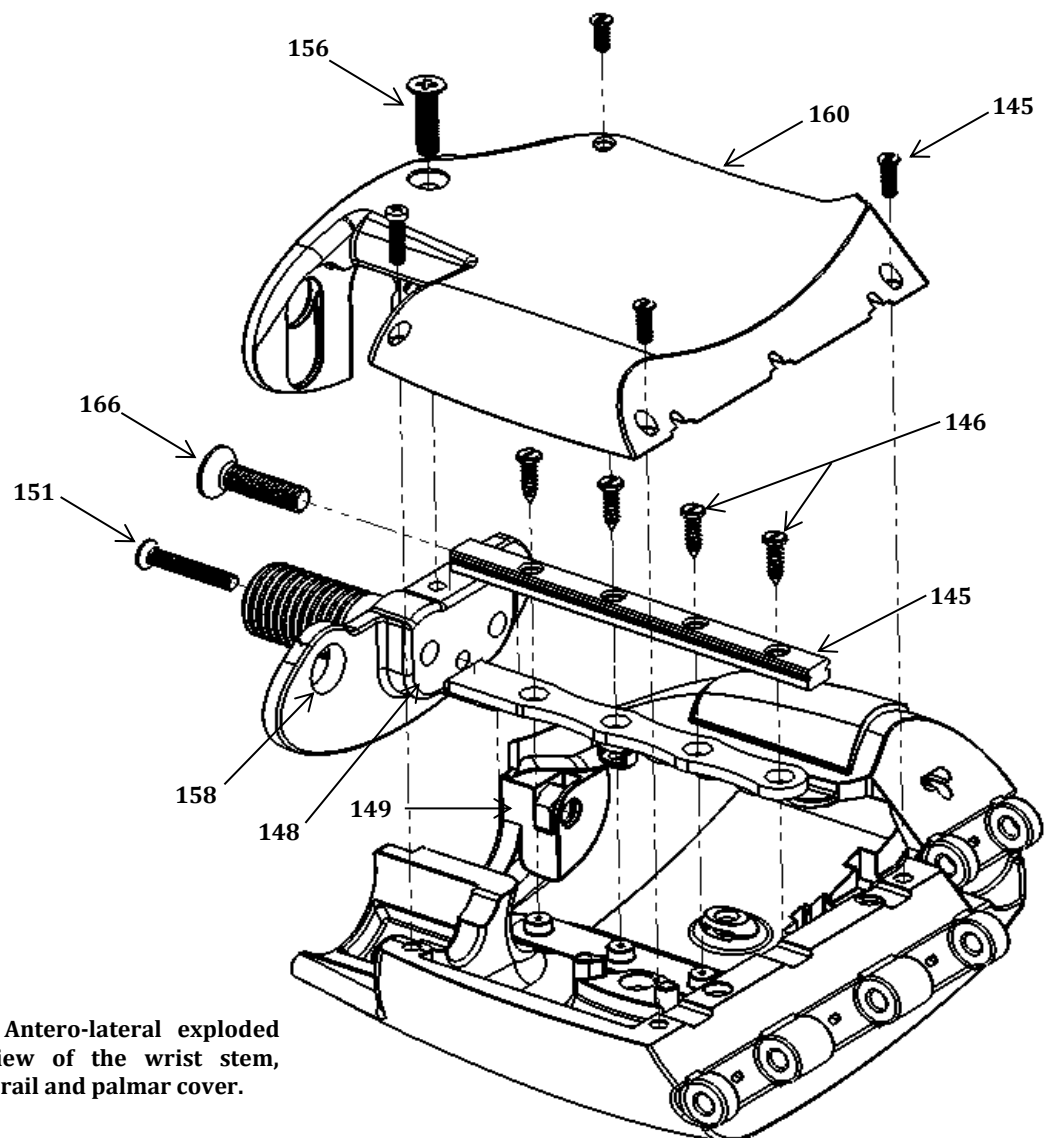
Antero-lateral exploded perspective view of the wrist stem, linear-bearing rail and palmar cover.
